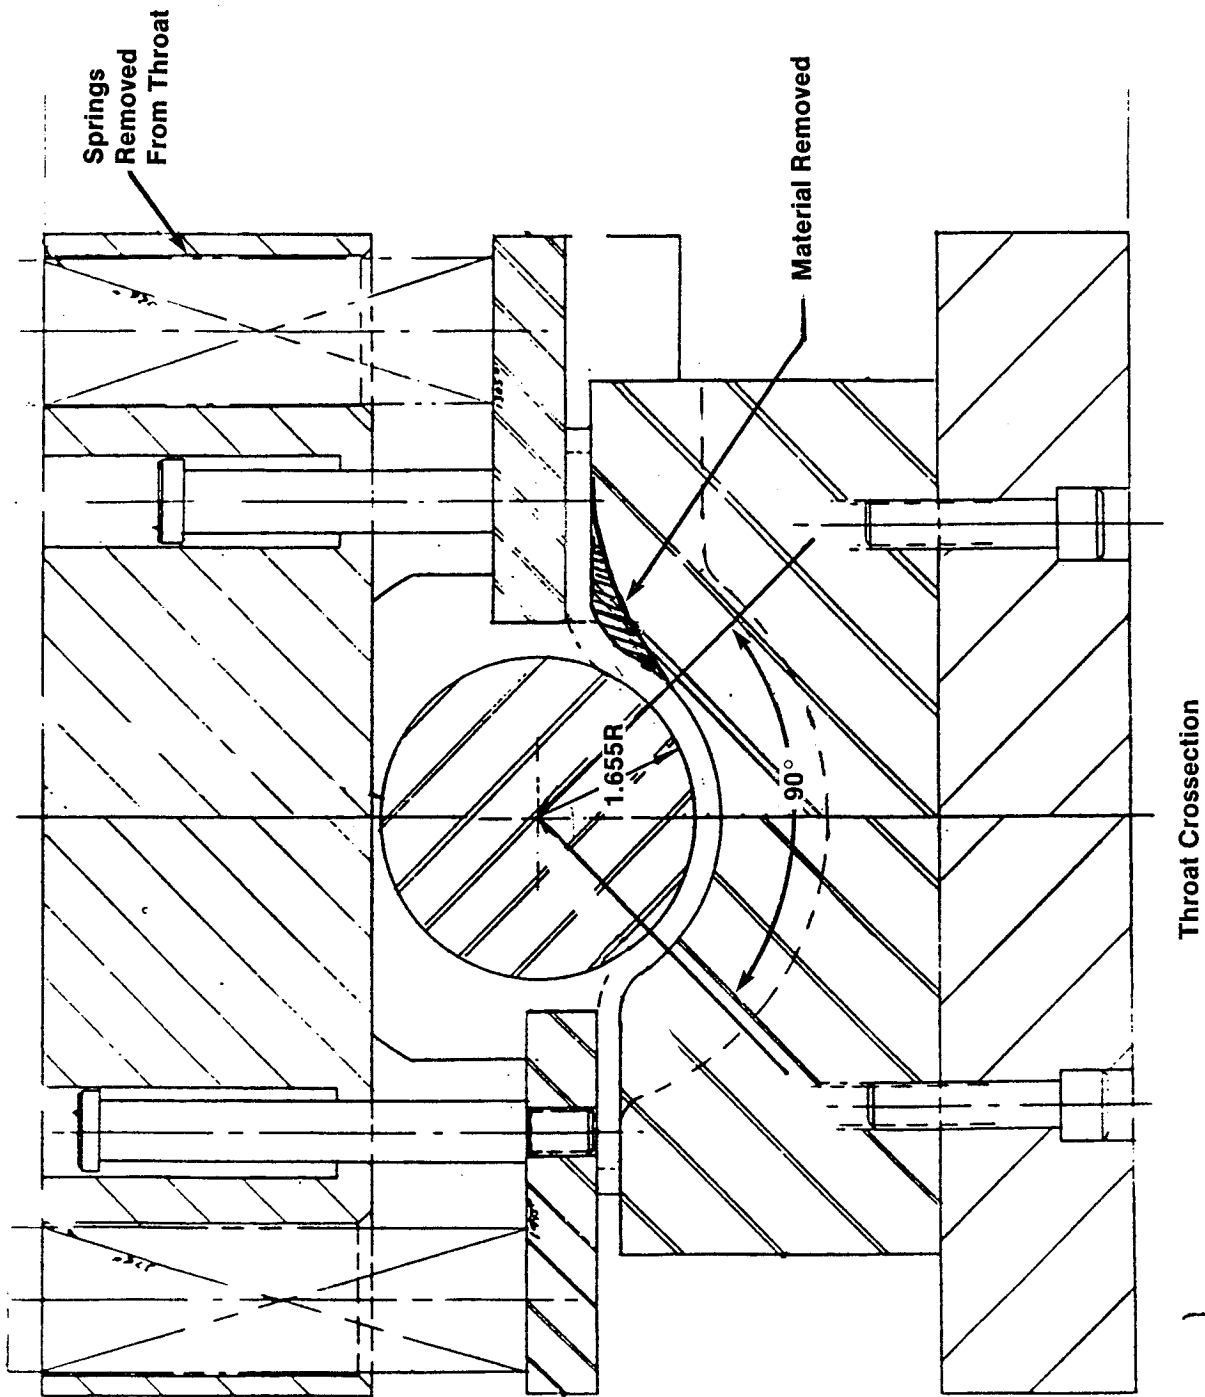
Tooling Modifications Were Necessary to Prevent Tearing of the Part
